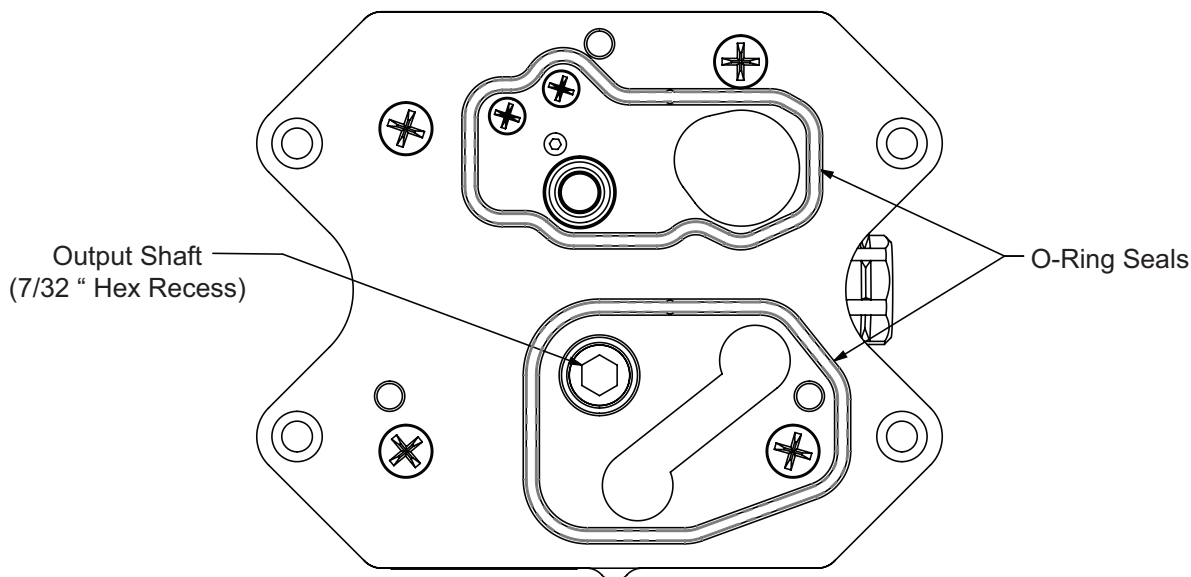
GSM 86 Servo Gear Box/Clutch - Rear View
